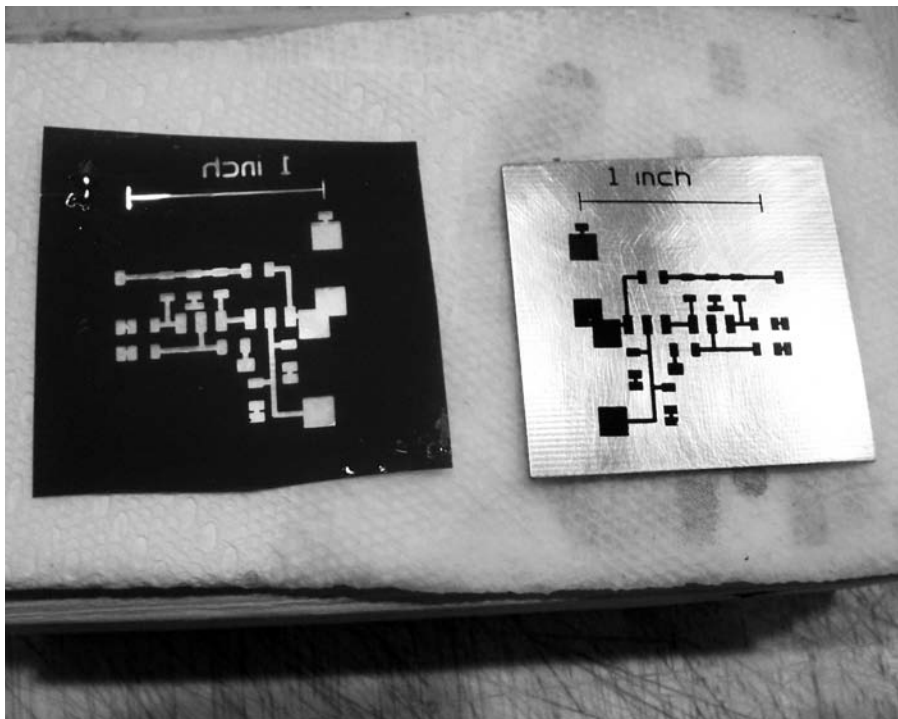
The copper clad circuit board material is on the right, with resist pattern after ironing. The Press-n-Peel material on the left is missing the track and pads.
